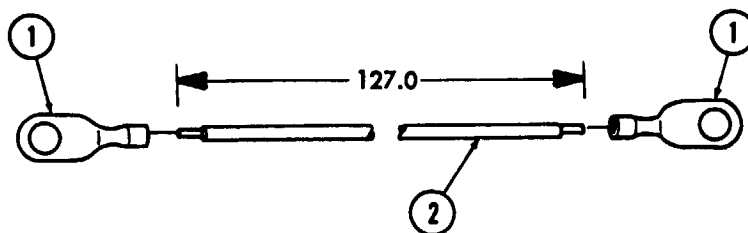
Wire "I" - Siren Assembly Mount to Relay Mounting Ground
